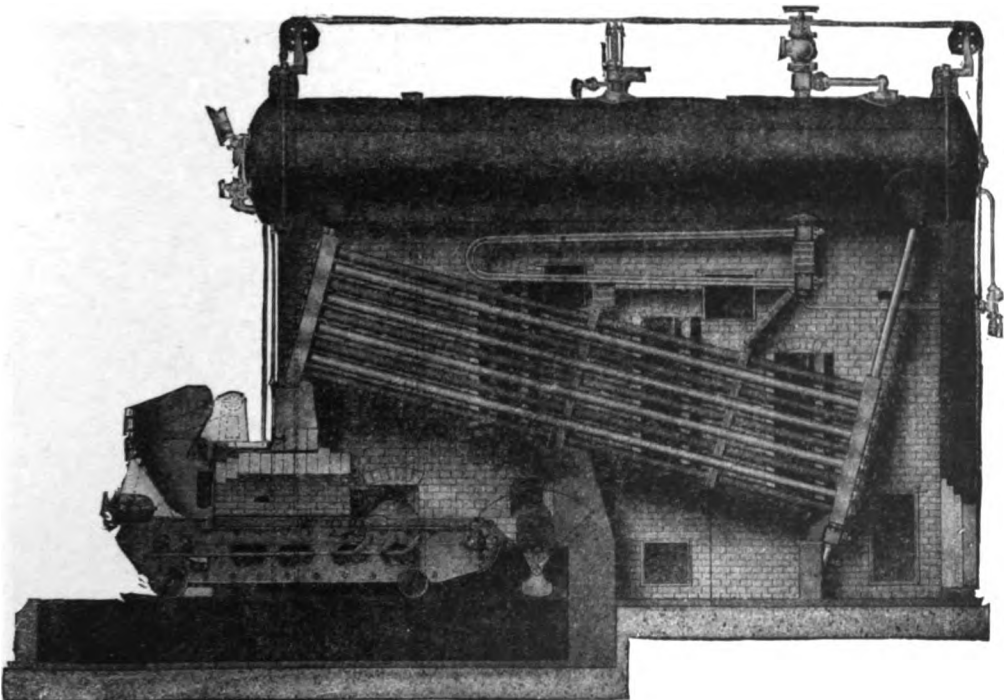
Babcock & Wilcox Water-tube Boiler, with Superheater and Mechanical Chain Grate Stoker.
